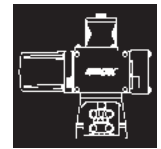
Model 11-260 Outline Dimension Drawings
